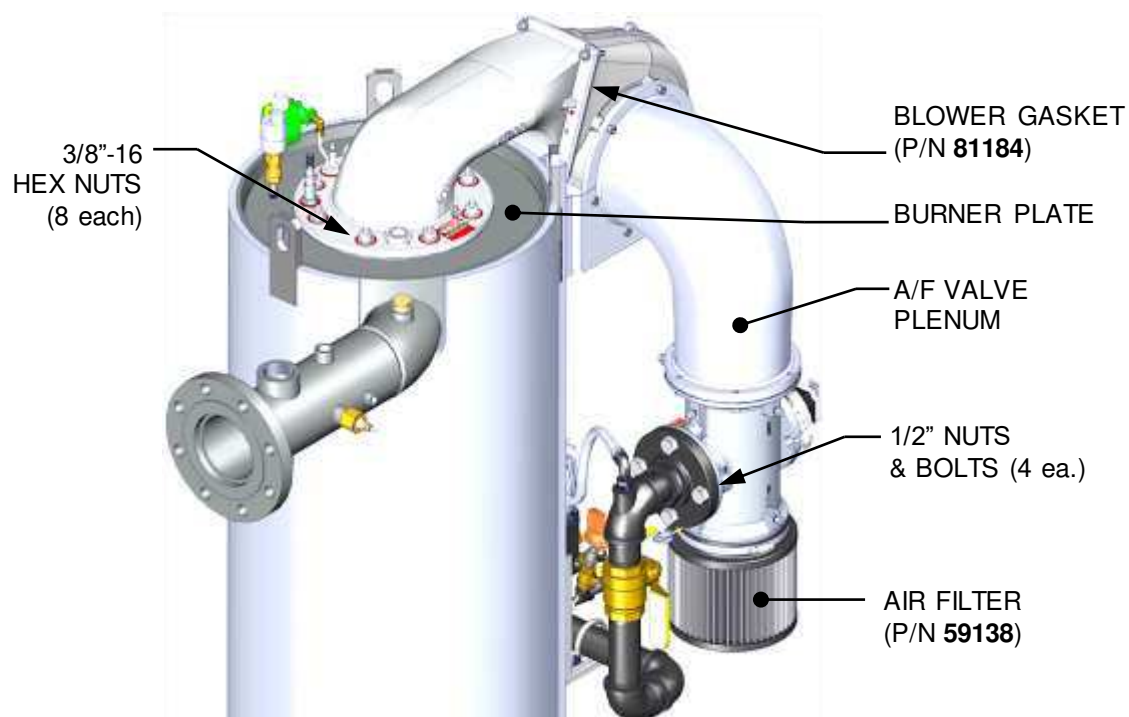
BMK1500/2000 Burner Assembly Mounting Details
